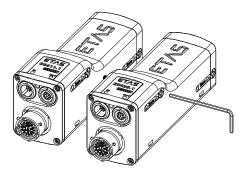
Connecting ES400 Modules Using the Integrated Assembly Elements
